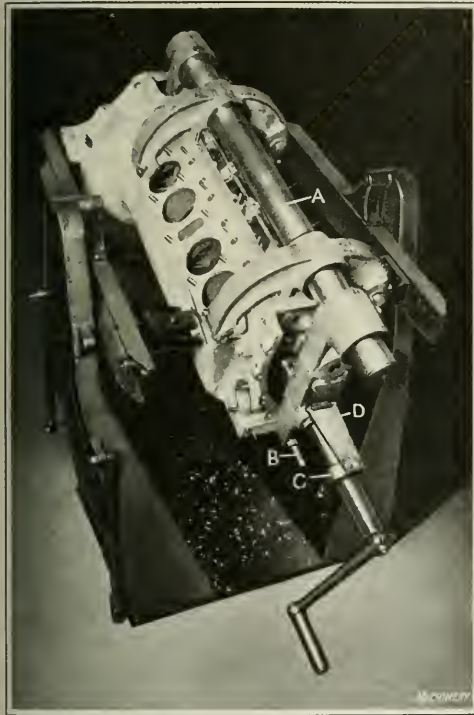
Boring-bar and Fixture used for refitting Main Bearings of Crankcases
